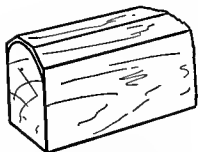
c*—End Cross-Piece Laid Out for Rounding Edges
